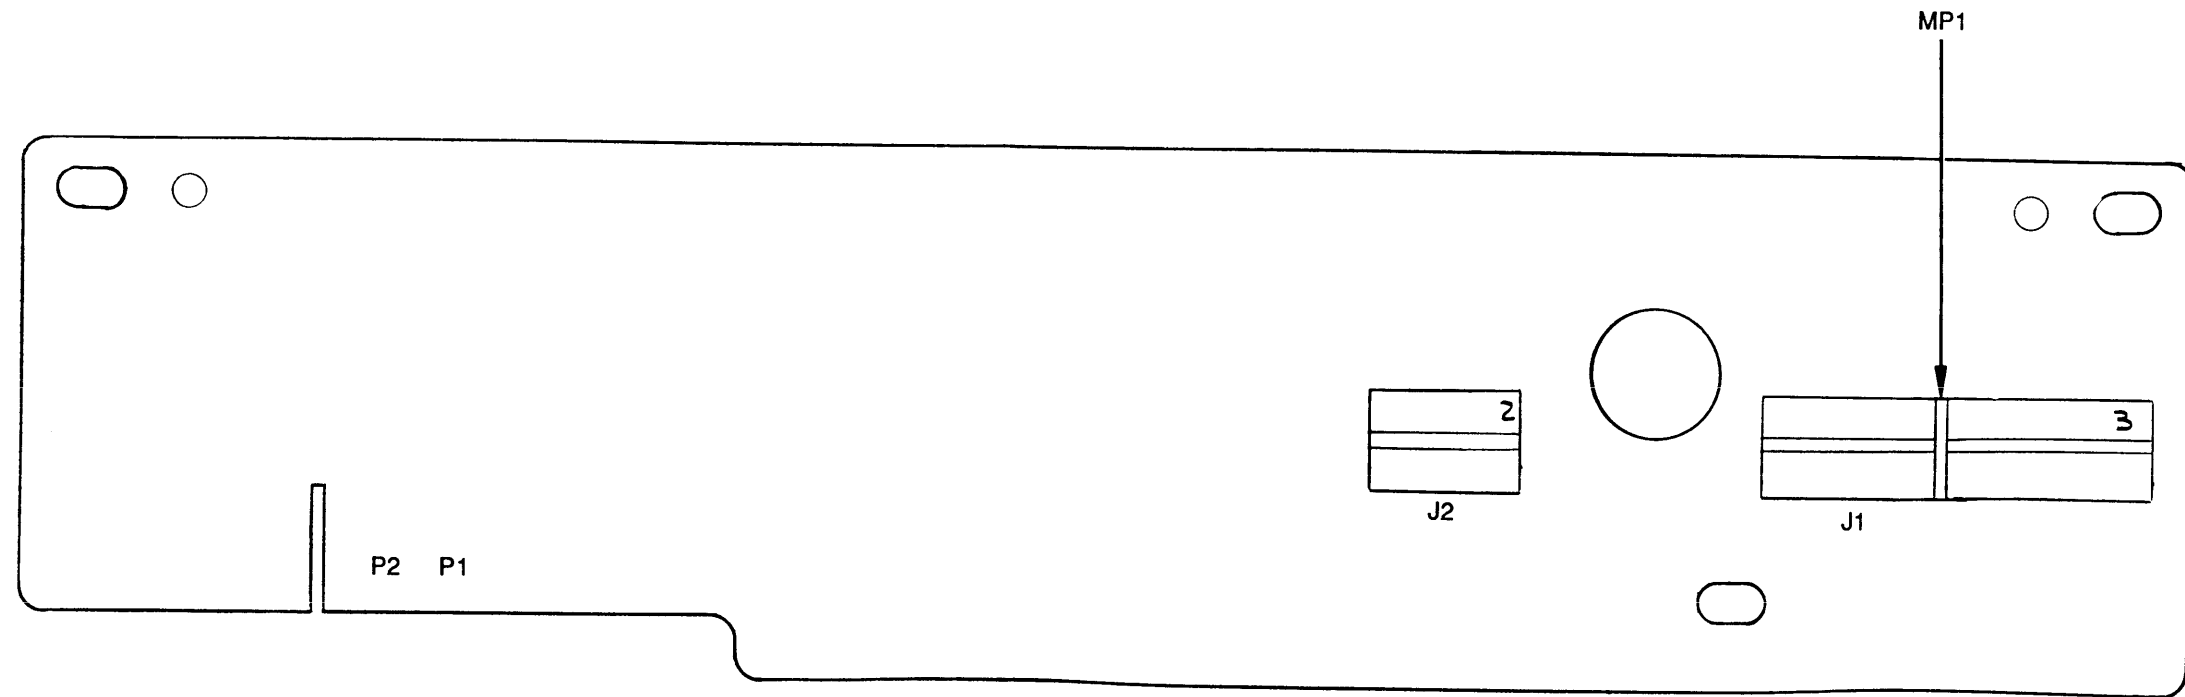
A5 Power Supply Interconnect PCB Assembly
